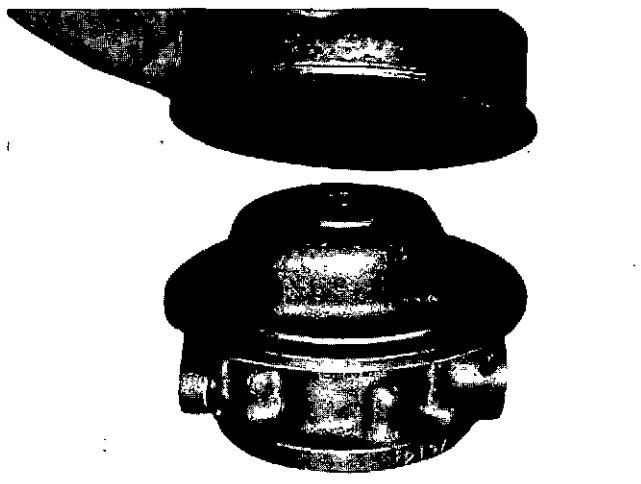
, (TA-26). Placing the shroud on the center housing
